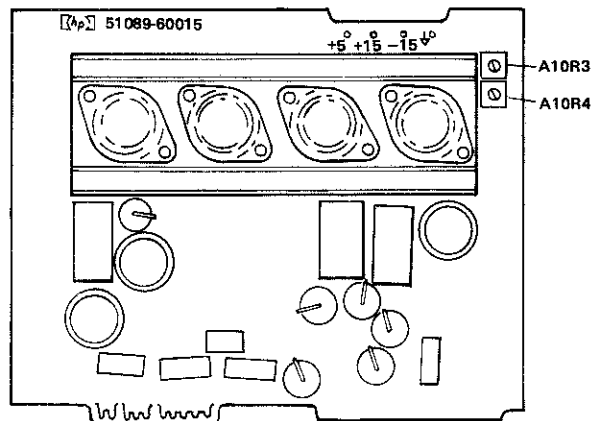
D. A10 Triple Regulator Board Adjustment Locator
